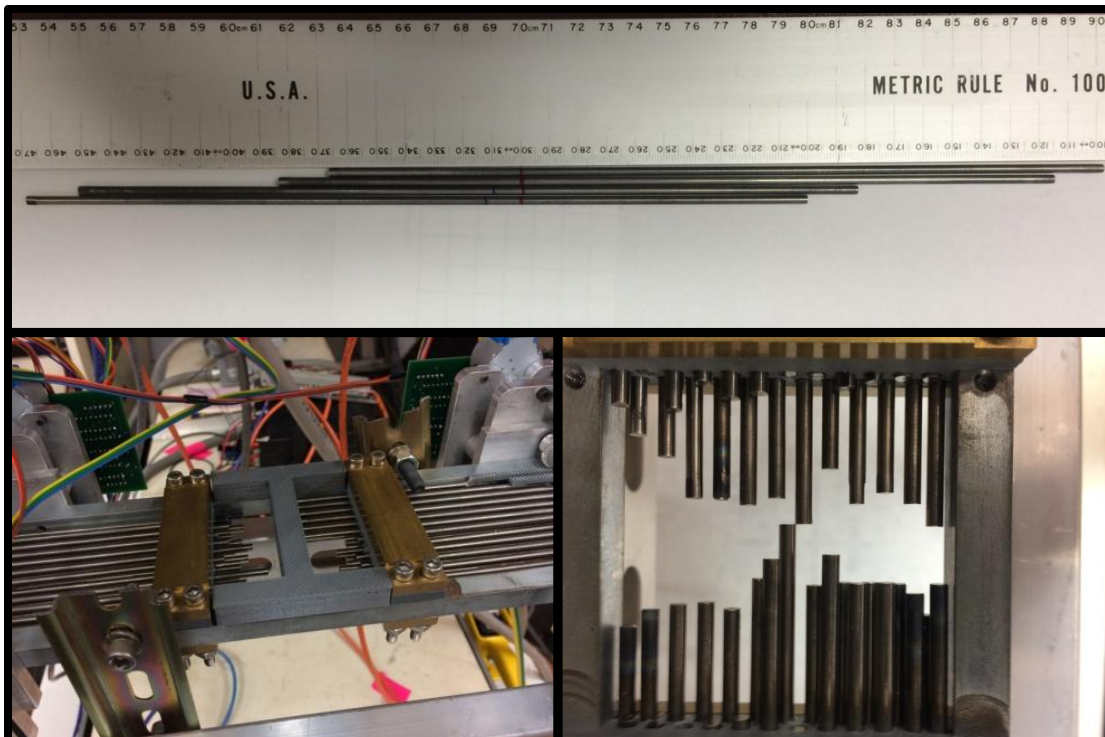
Tungsten carbide rods, MRC assembly with initialization jig in place, and offset rod display.
